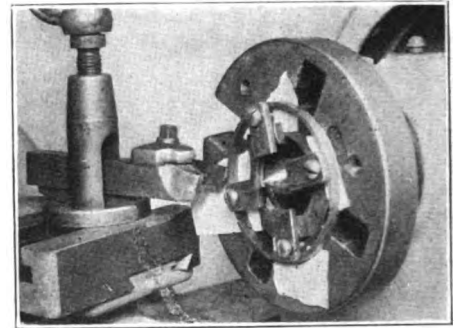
With Parting Tool Test Position of Ring on Face Plate.
